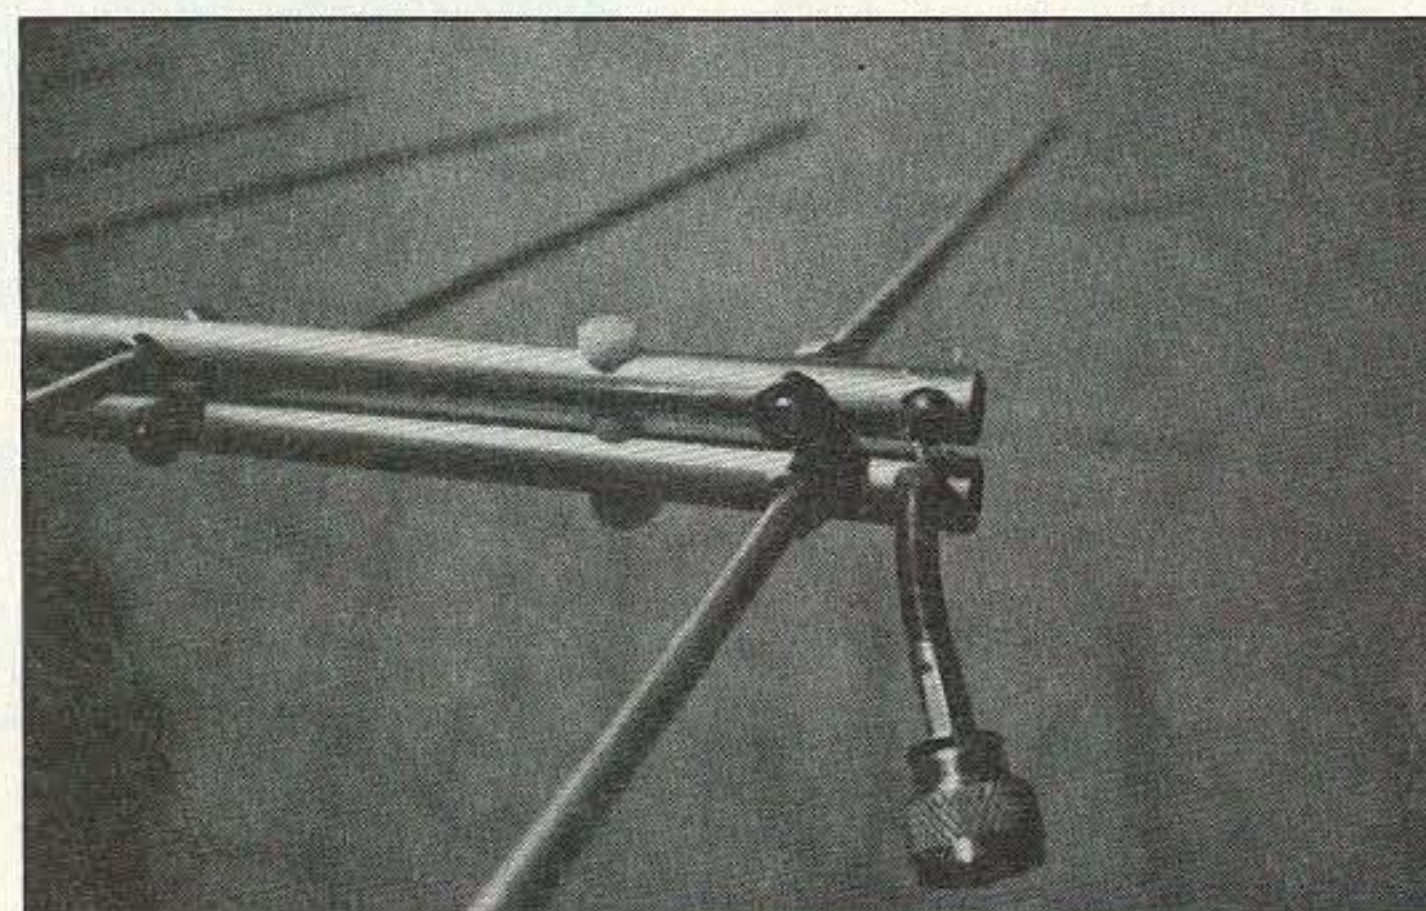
Photo C. Detail of the boom, element assembly and feedpoint attachment.
